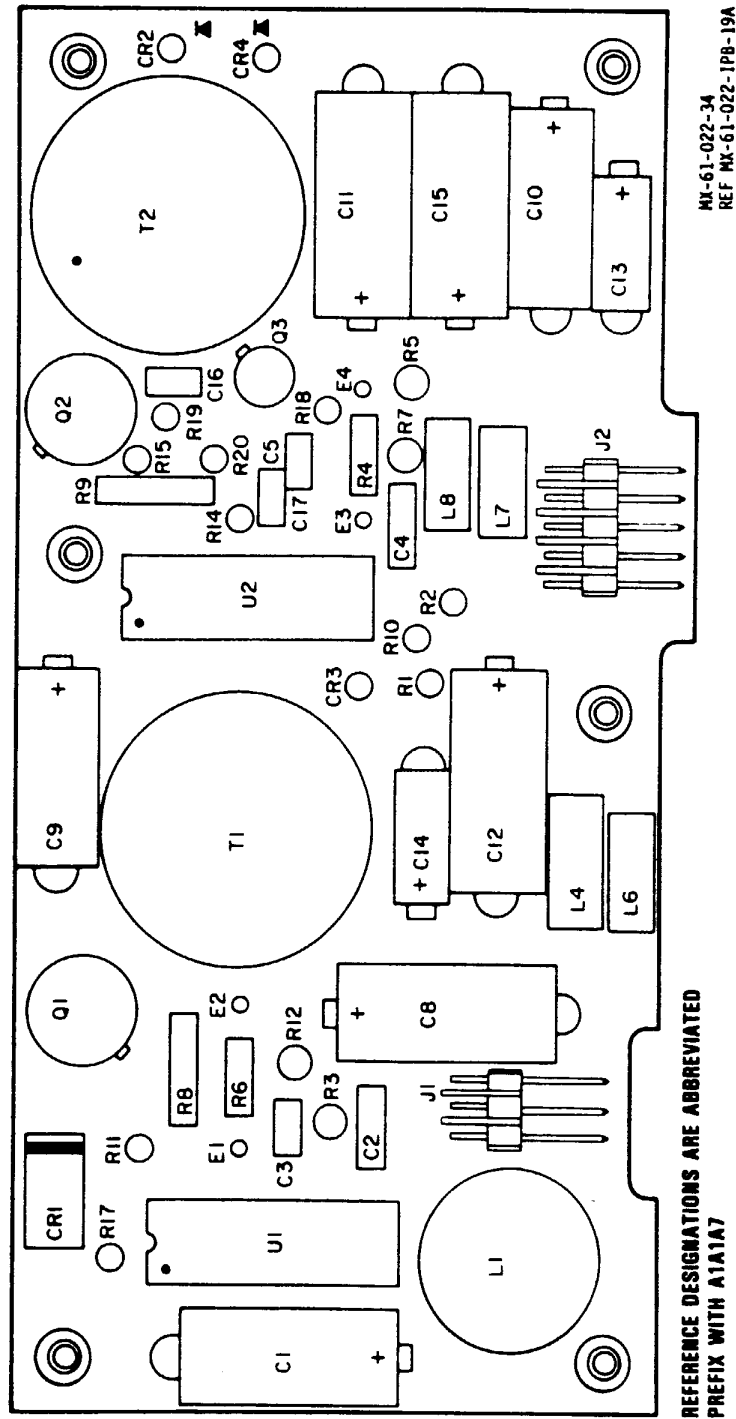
Power Regulator Assembly A1A1A7 Component and Test Point Location Diagram
